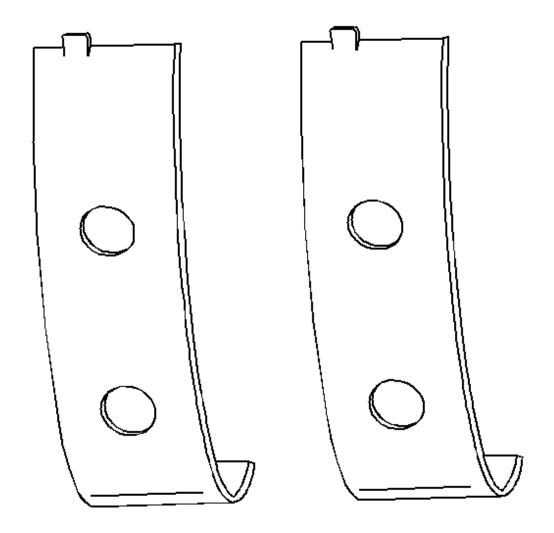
View Of Crankshaft Bearings Courtesy of GENERAL MOTORS CORP.
